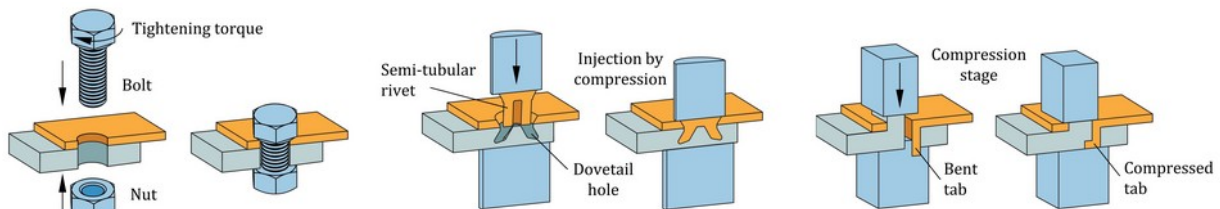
Fastened, injection lap riveted and sheet-bulk compressed hybrid busbar joints.
